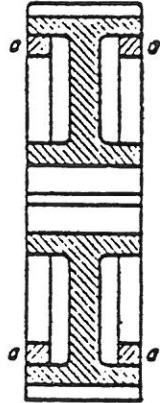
Gear with sound-dissipating rings inserted. These should be either shrunk or tack-welded in a few spots so as to allow some relative rubbing during the vibration.
